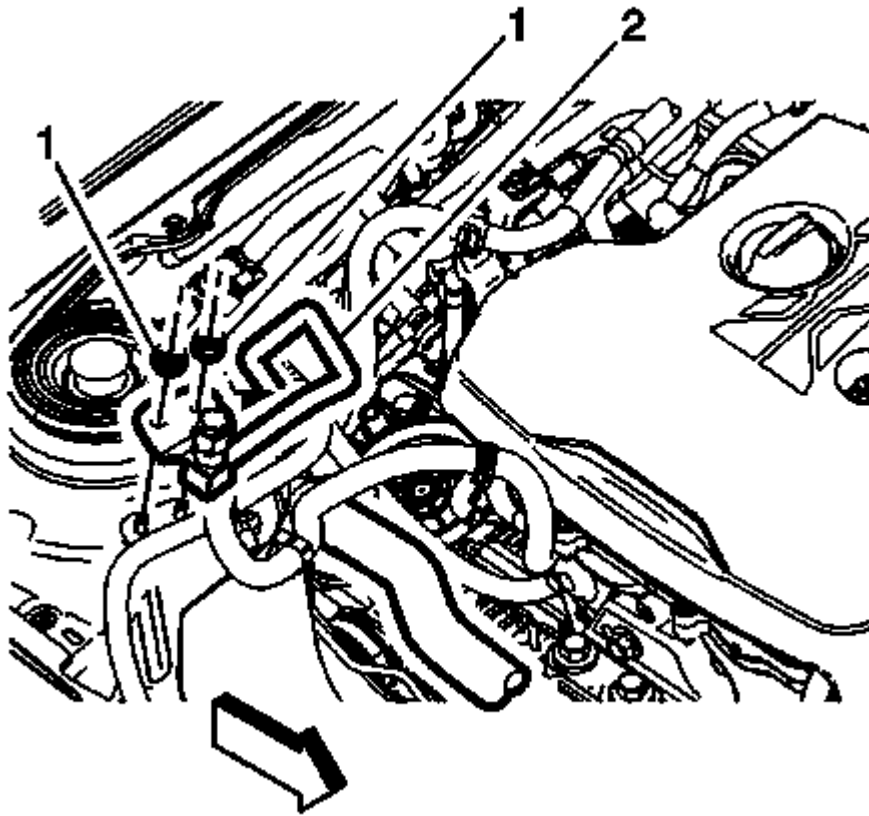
Air Conditioning Evaporator Hose Assembly & Retaining Fasteners
